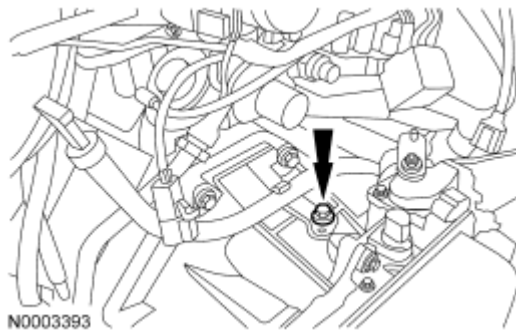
Locating Transaxle Fluid Level Indicator Tube Bolt
